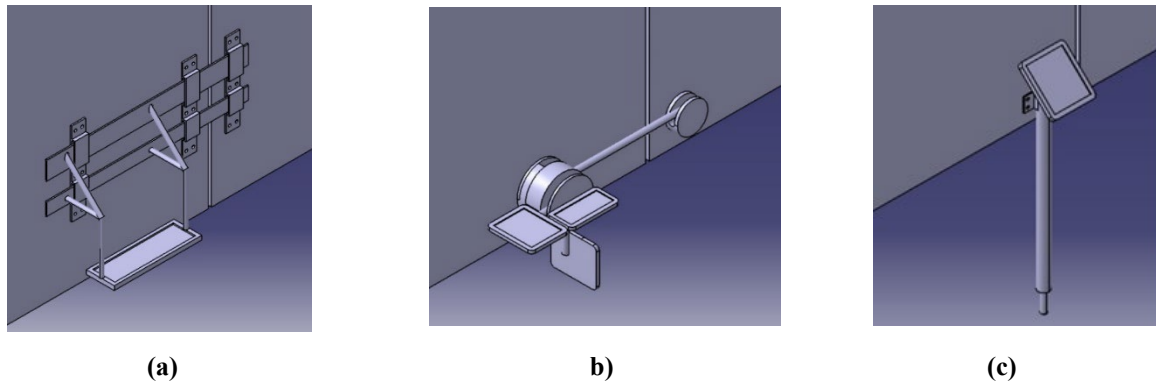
Alternative design concept 1 (a), concept 2 (b) and concept 3 (c).
